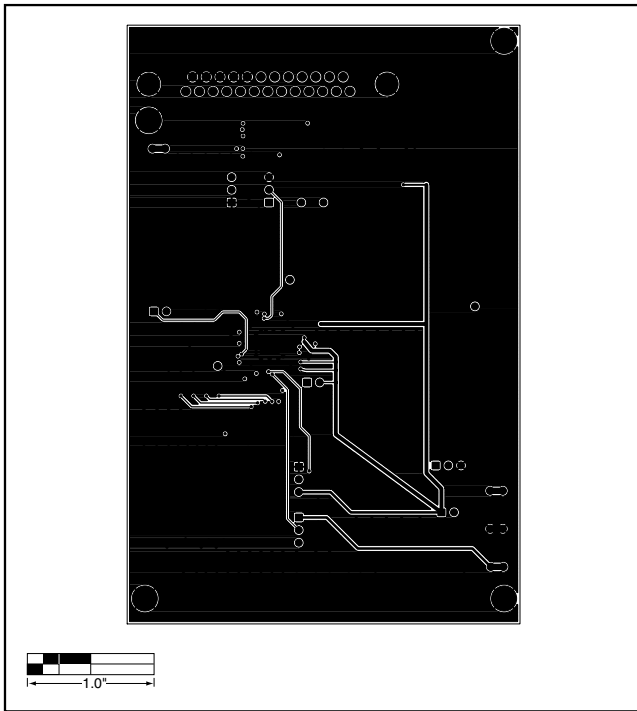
MAX2745 EV Kit PC Board Layout—Layer 3
